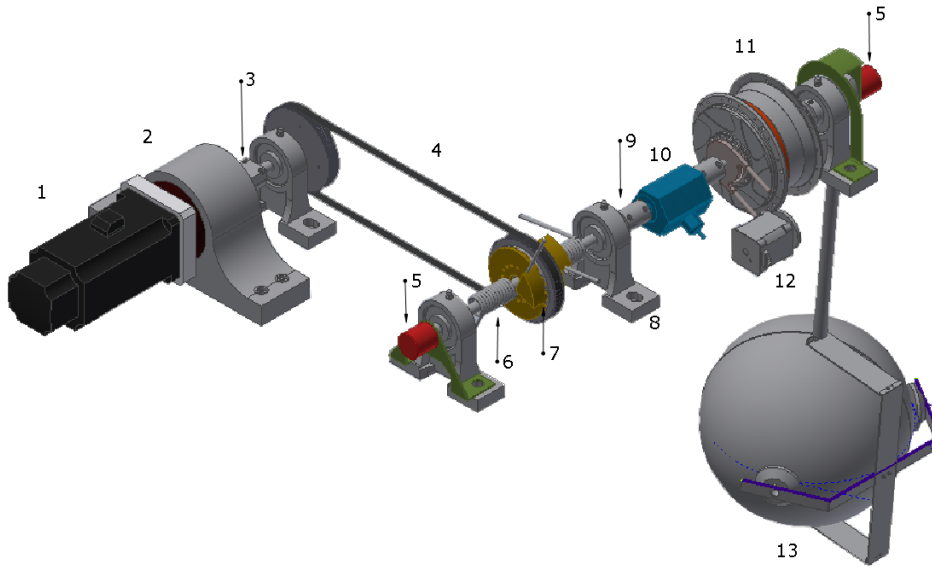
1.Motor 2.Motor Cup holder 3.Motor-shaft coupler 4.Belt-Pulley system 5.Encoder & holder 6.Torsional spring 7.Spring preload mechanism 8.Bearing & housing 9.Shaft Coupler 10.Force sensor 11.CVT 12.Stepper motor & belt-pulley 13.Ball throw mechanism
